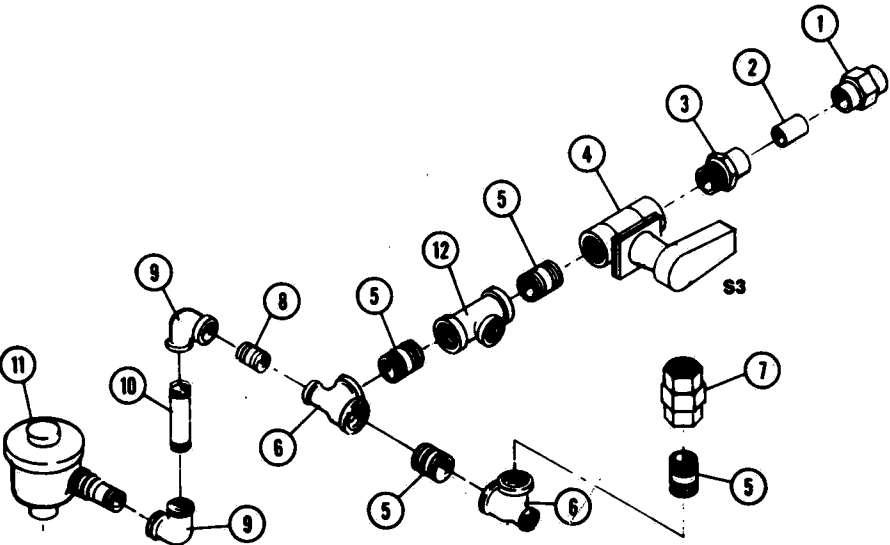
CHAMBER DRAIN ASSEMBLY.
